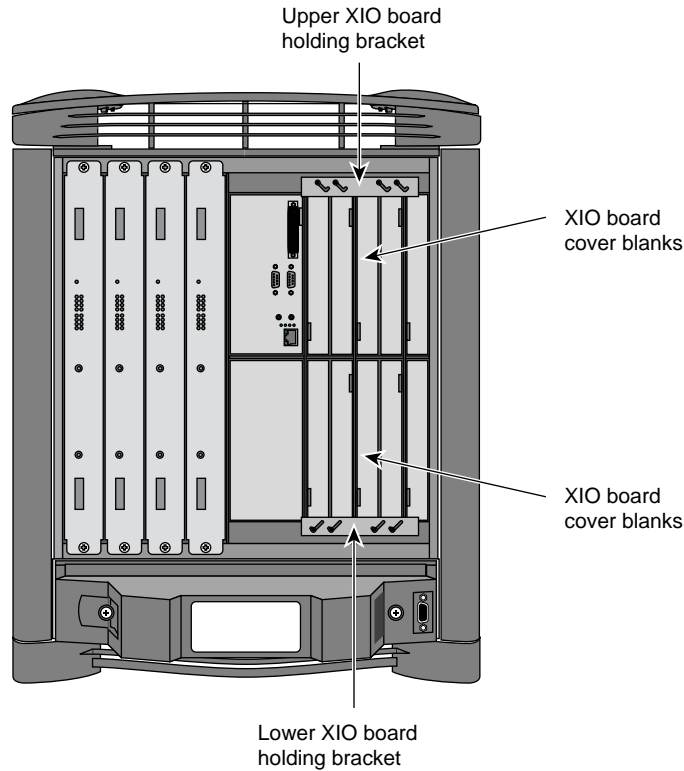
XIO Cardcage Holding Brackets and Cover Blanks
